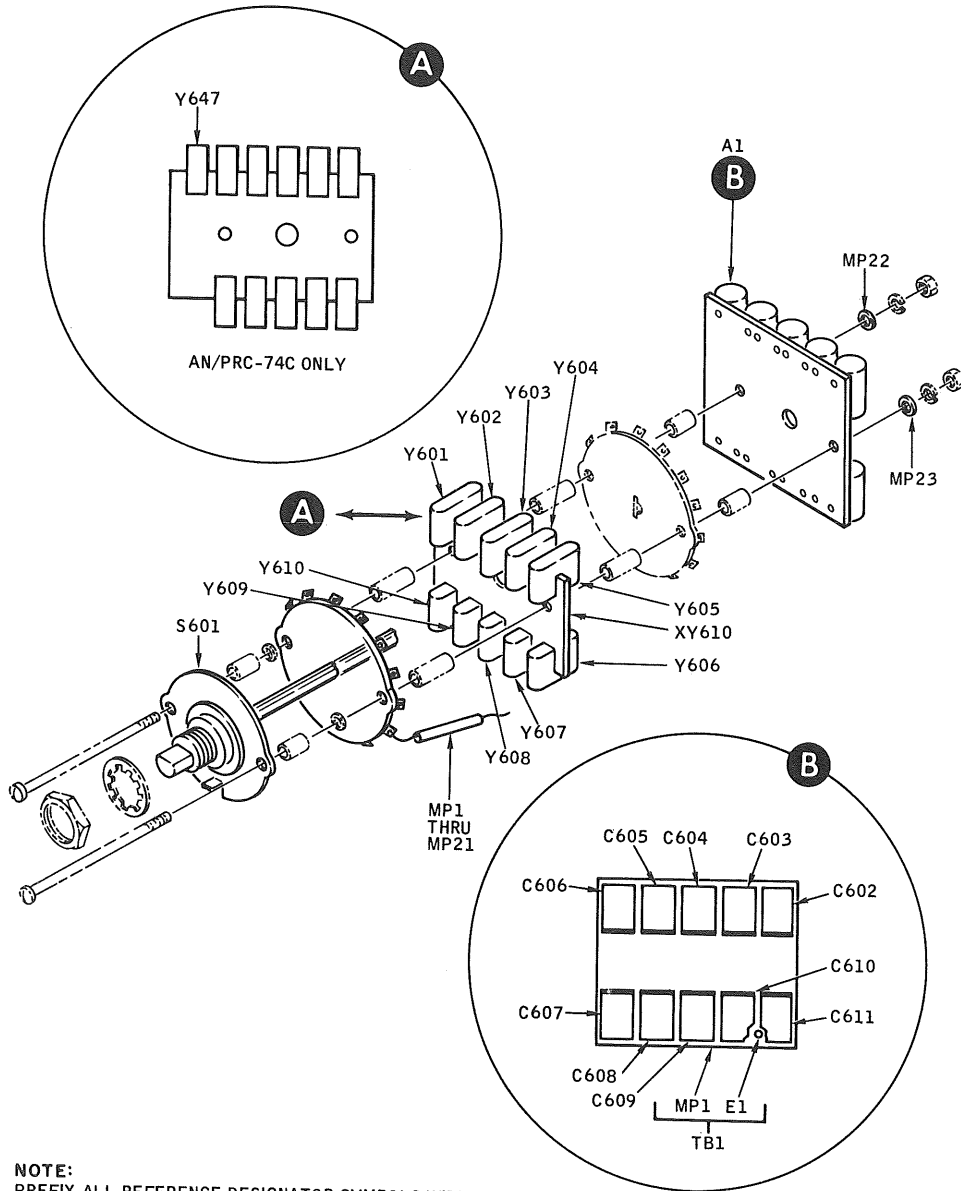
Frequency synthesizer module, switch A1 disassembly.
